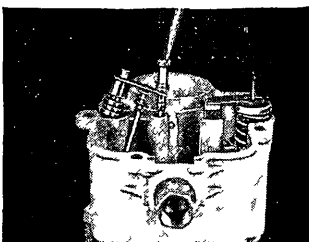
Remove idle mixture tube and plug, step-up piston plate and rod
